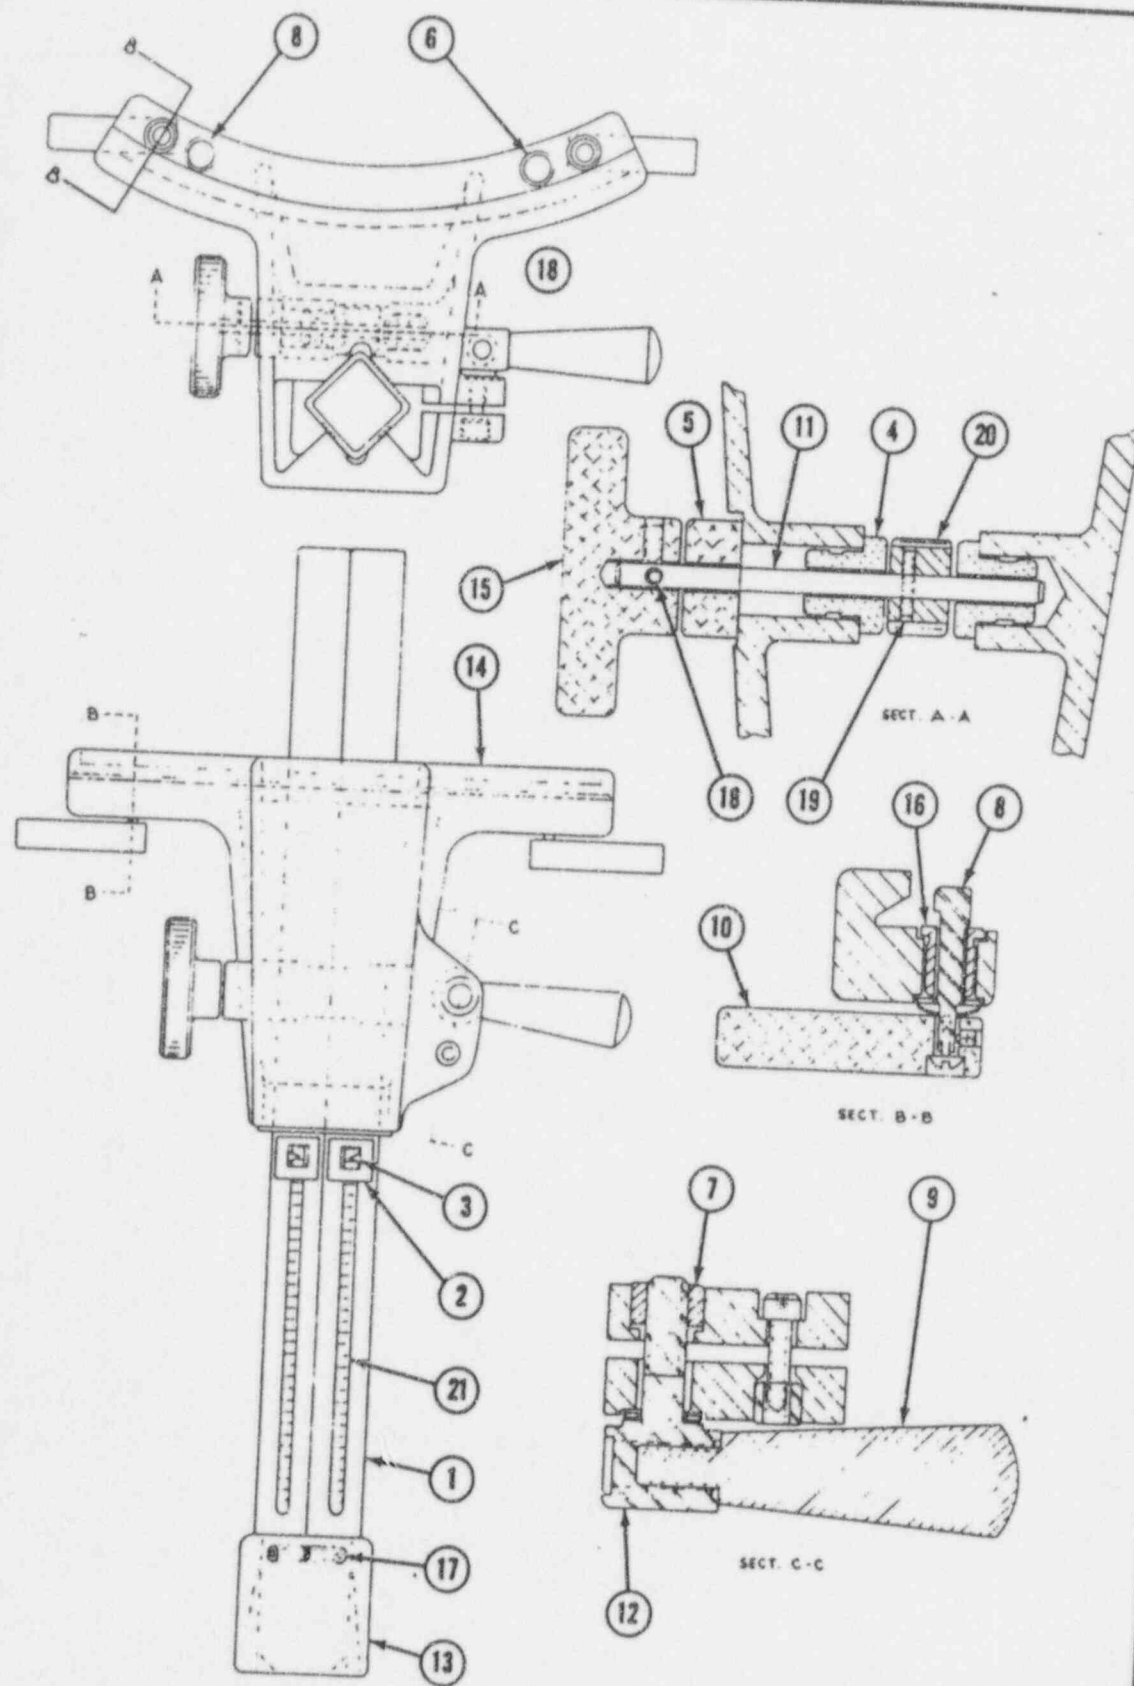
COBALT, ACCESSORY ATTACHMENT POST ASSEMBLY
